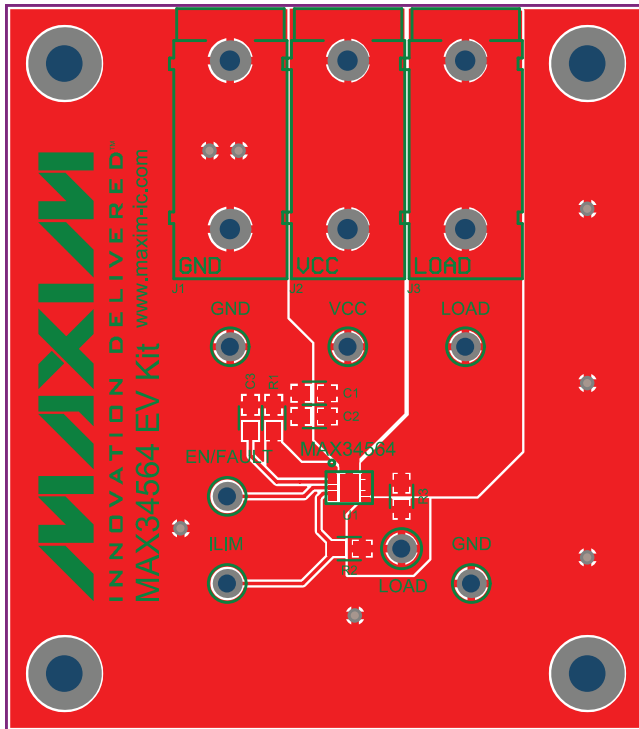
MAX34564/MAX34565 EV Kit PCB Top
